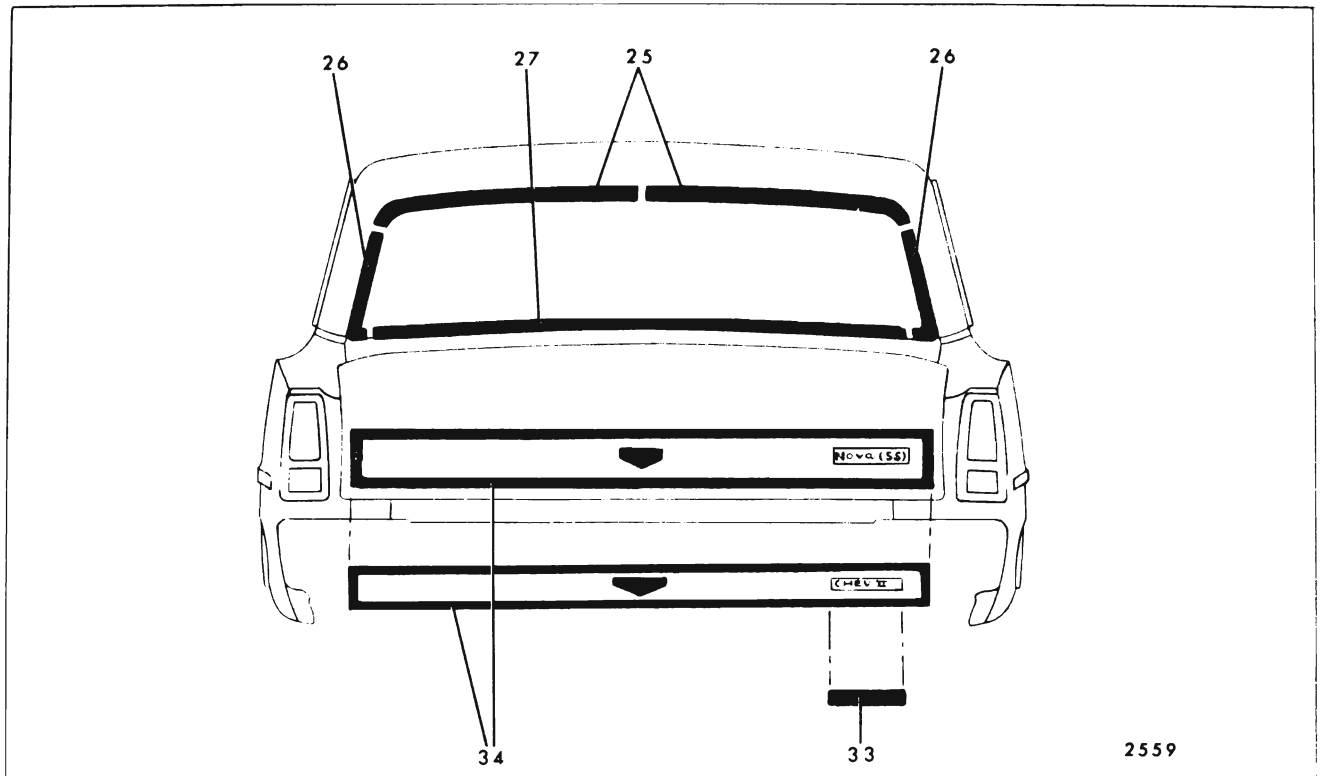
Chevrolet 11400-11600-11800 Styles (Except 35 Styles)
